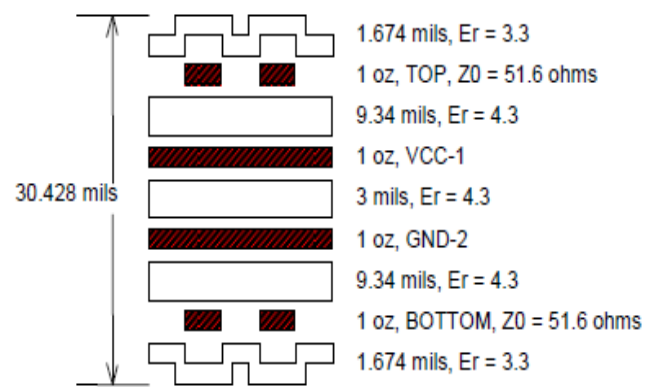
Proposed 4 layer stack up with 32 mil board finishing
